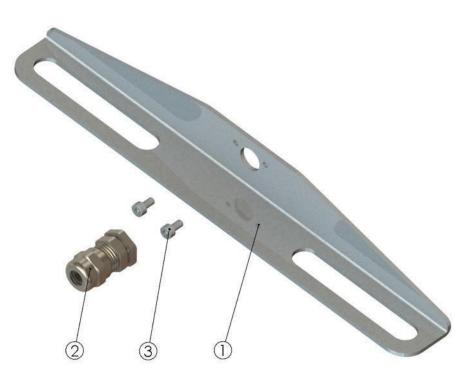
Mounting kit for G1, G2 and G3 indicators
